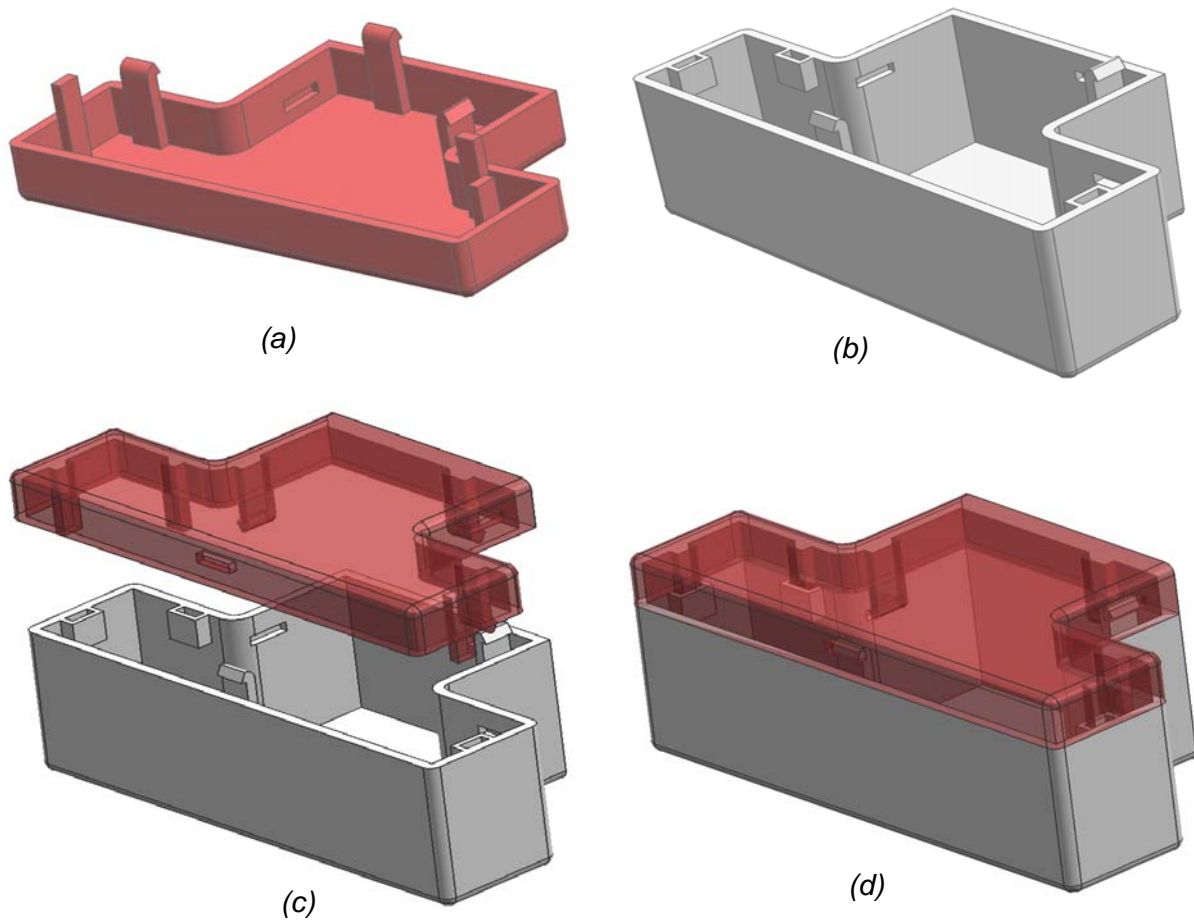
CAD drawing for the optimized DVD player model, (a) top part, (b) base part, (c) exploded view and (d) assembled view.
